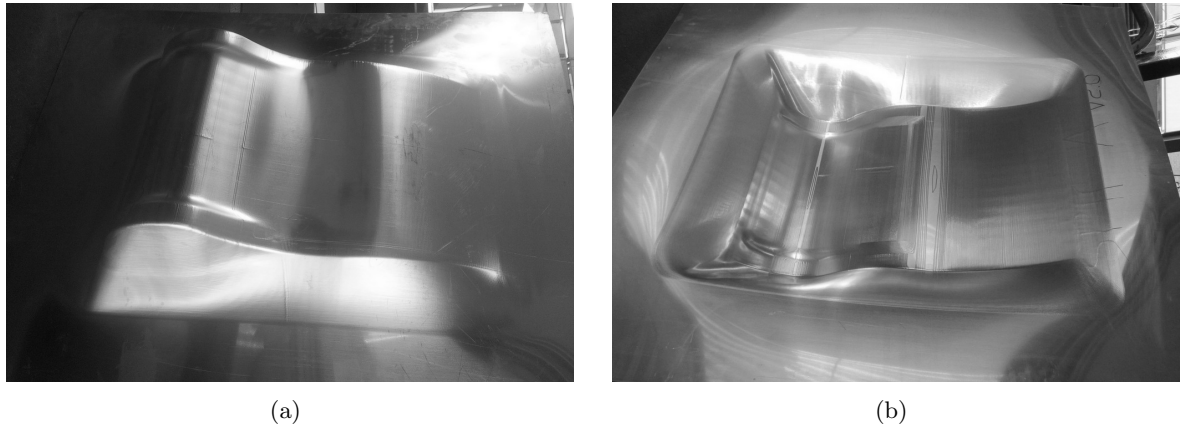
Train seat back rest rear panel SPIF mould: (a) outer side, (b) inner side
